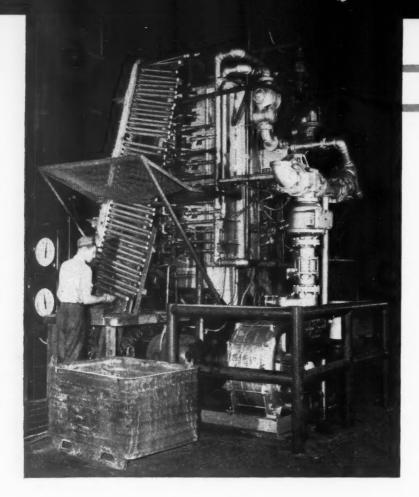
Vertical conveyor type of high-speed gas furnace employed to heat the ends of long steel bars preparatory to forging
